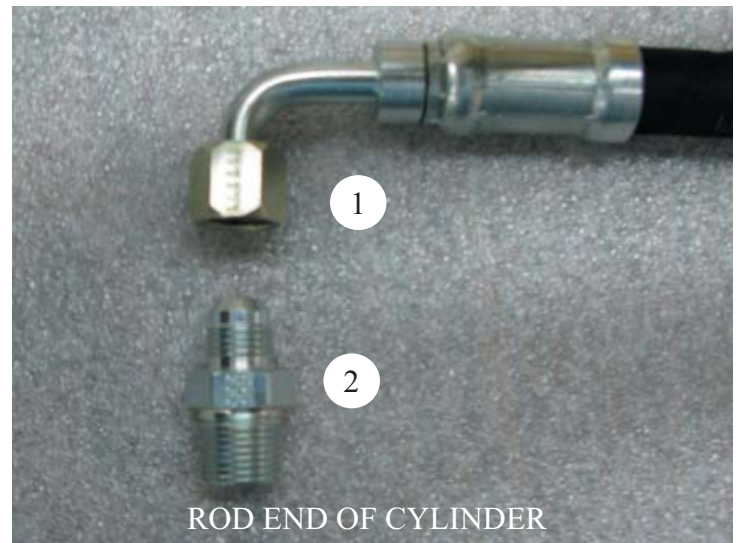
Fitting Assembly of RIGHT Cylinder
